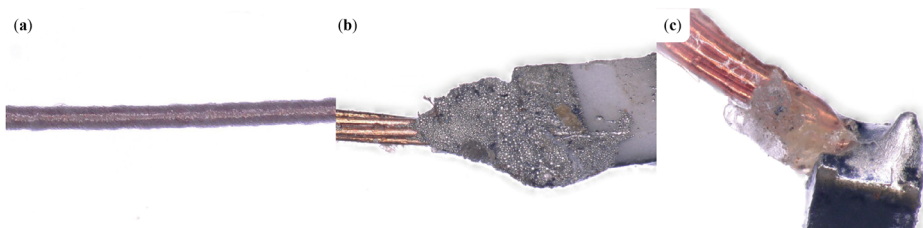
(a) An image of a Litz wire. (b) A component soldered onto a multi-strand copper wire using reflow soldering. (c) A component soldered onto a Litz wire using a soldering process.
